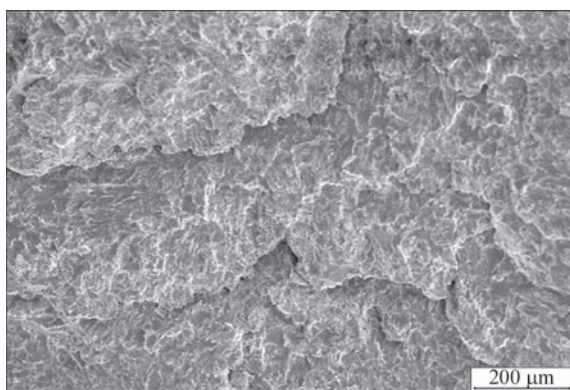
Fractogram of fracture surface of initial metal of titanium intermetallic of TiAl system using LHT
